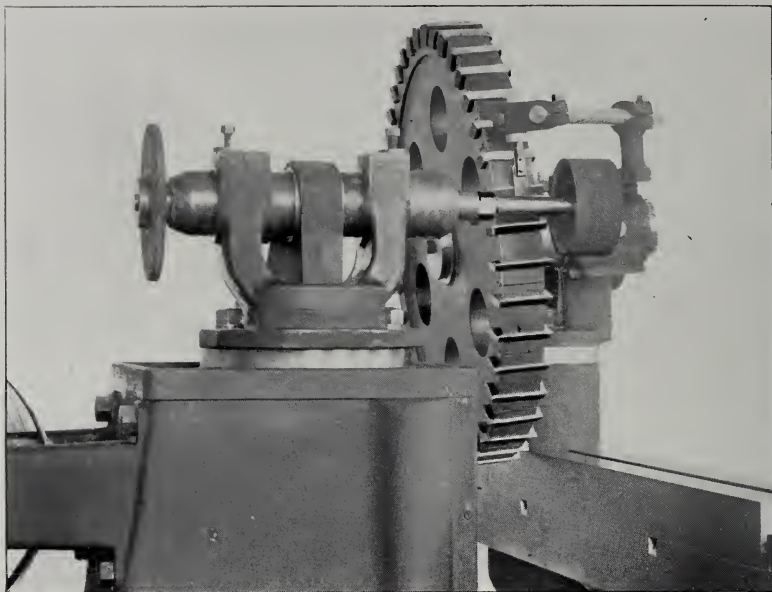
SHARPENING SIDE MILLING CUTTERS OF LARGE DIAMETER ON THE CINCINNATI GRINDER
